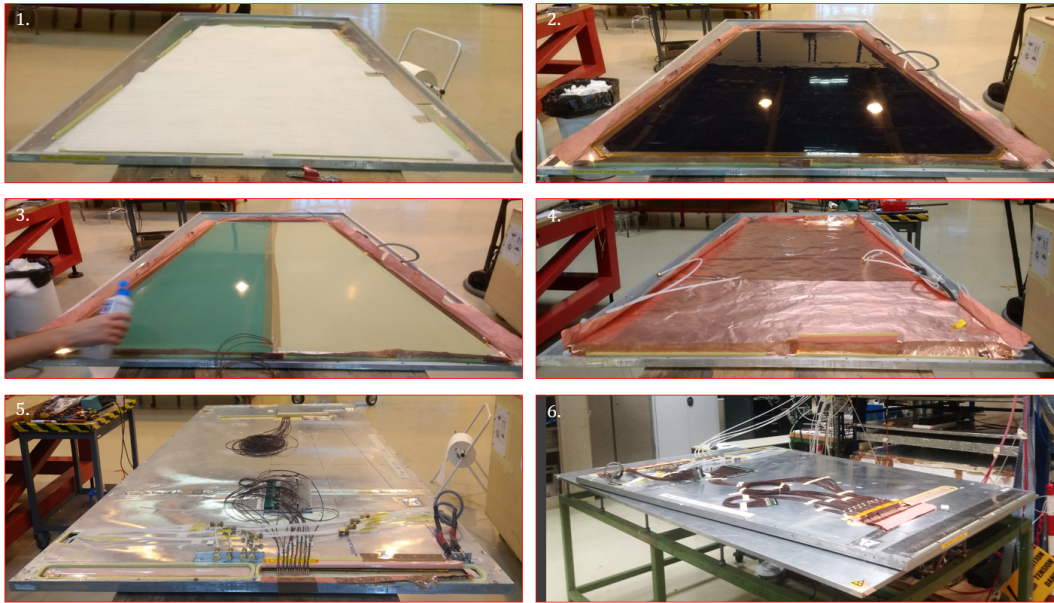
iRPC RPC RE3/1 detector prototype assembly procedures: 1 - preparation of detector casing by covering it of Mylar layer and fixing insulated holding bars into place; 2 - installation of bottom gap inside the prepared detector casing; 3 - the installation of readout and fake strip by covering the a bottom gas gap, cleaning procedures of the components of strip panel by using an isopropyl alcohol ($(CH_3)_2CHOH$) 4 - closing of the Faraday Cage; 5 - closing of prototype by using the prepared top honeycomb panel and preparation of pipelines and cables laying; 6 - completed of iRPC RE3/1 detector prototype assembly and flushing of gas gaps.
